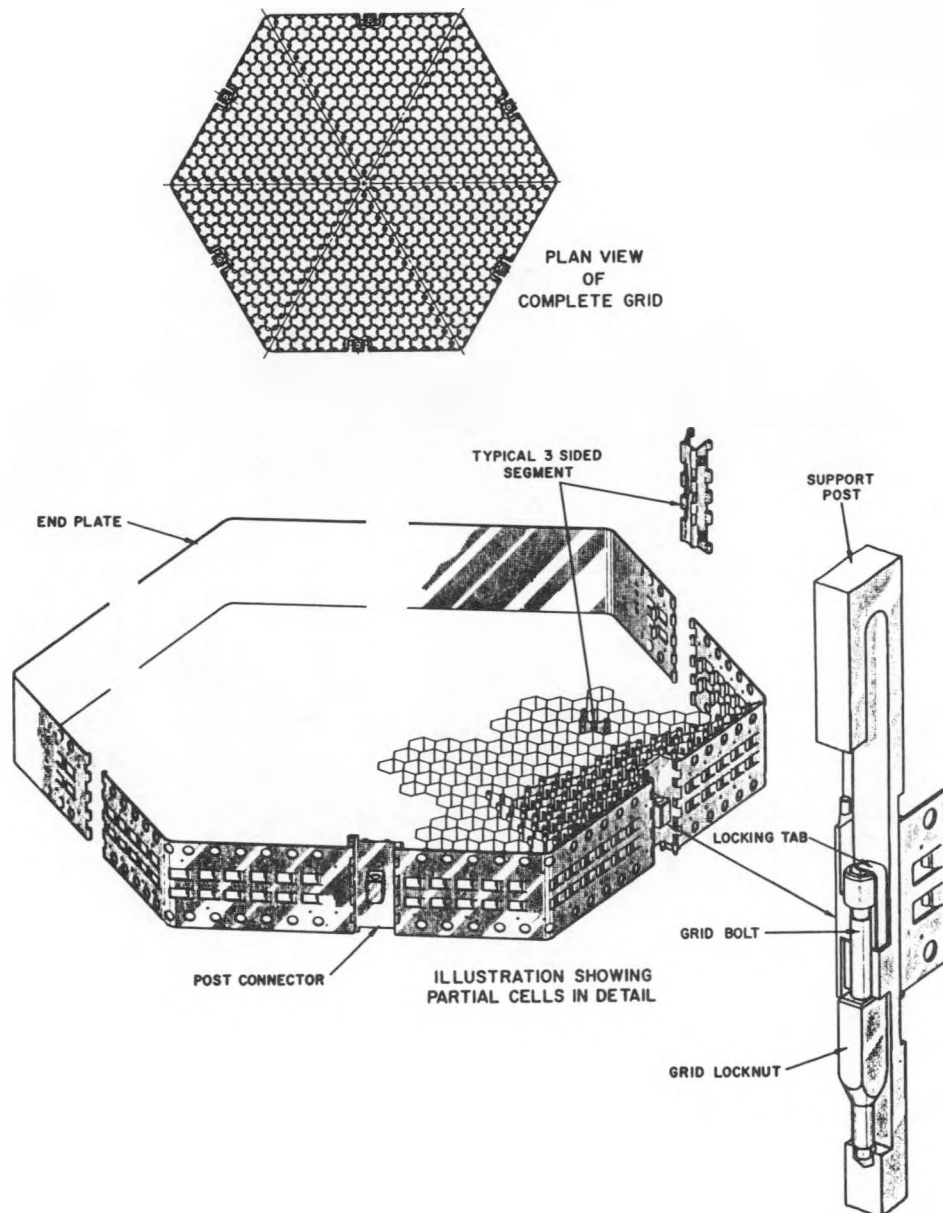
LWBR Seed Module Grid-to-Post Attachment
